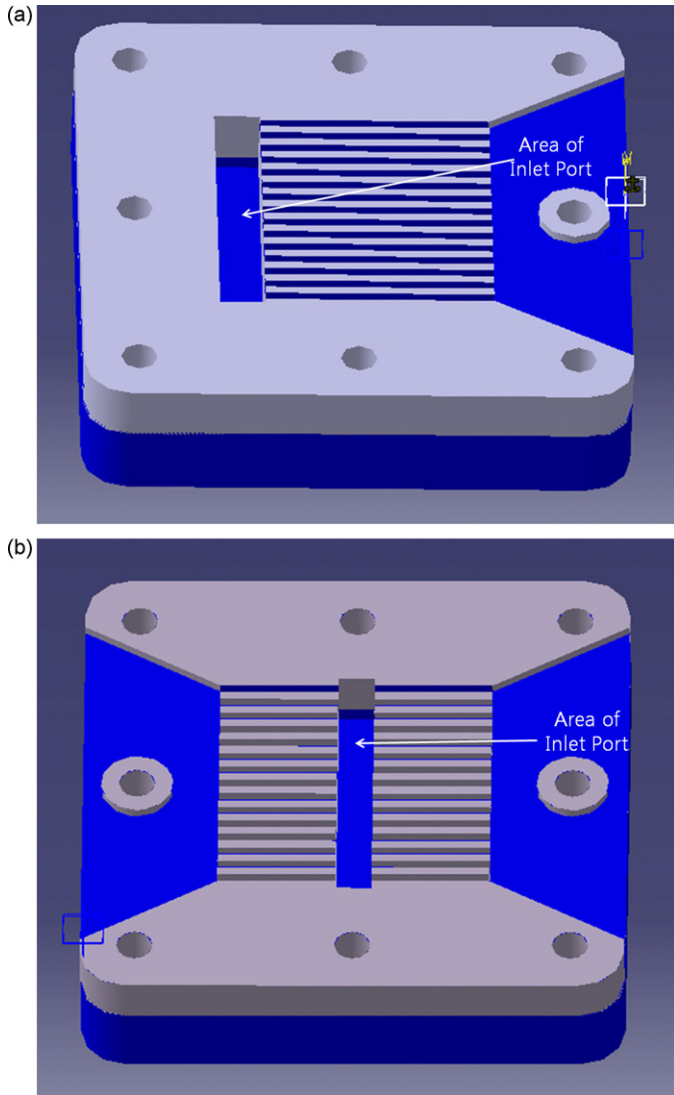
Position details of inlet and outlet in parallel-channel configuration: (a) side inlet and (b) central inlet.
